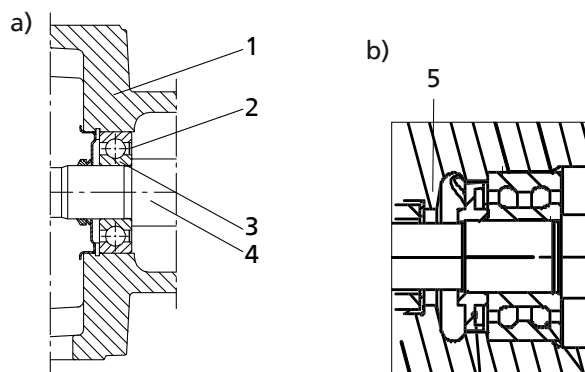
Installing the radial ball bearing a) shaft units 25 and 35 b) shaft unit 17
